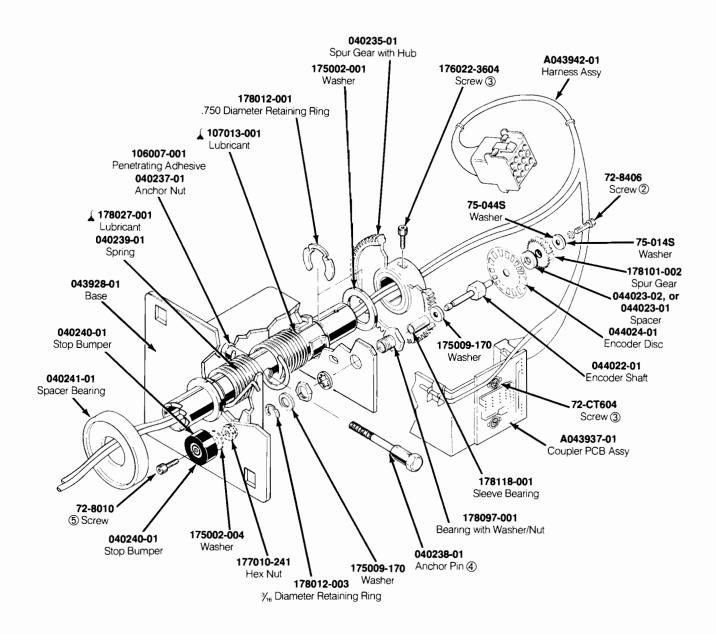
RTC Steering Control Disassembly and Lubrication, Continued
